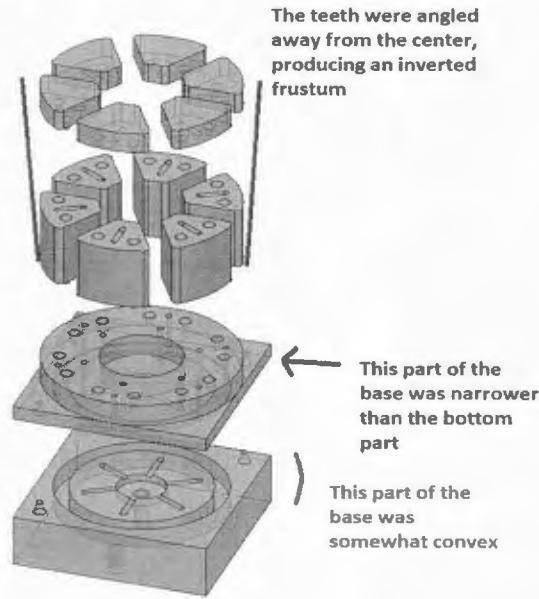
Illustration of the 3D printed stator magnetic core assembly with cooling channels.
